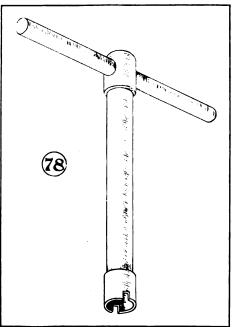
Slotted tool for removing and replacing the spray nozzle on the Holley carbureter
